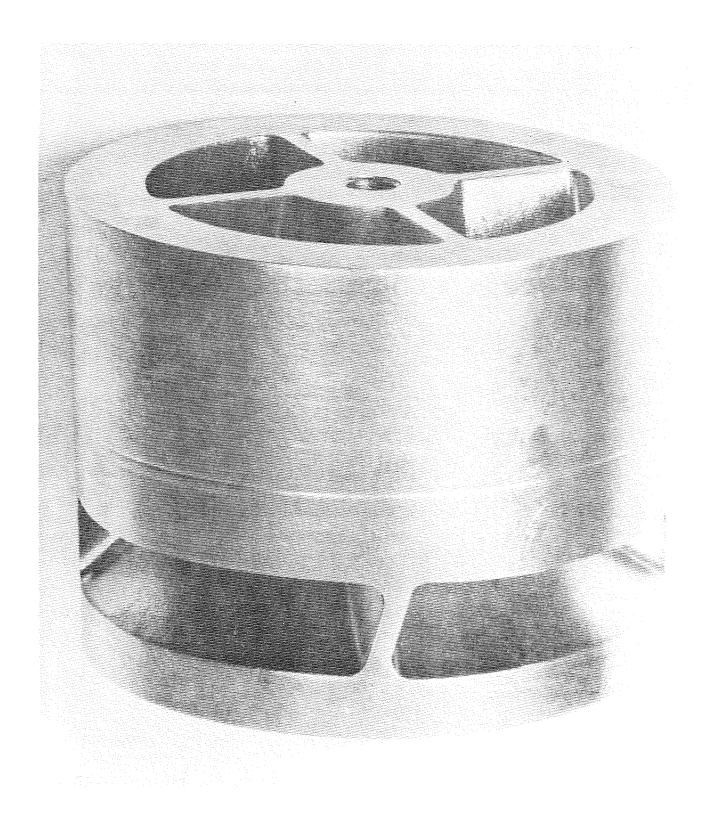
Final Simulated Impeller Showing Discharge Area After Removing 0.020 of an Inch of Material From All Surfaces by Chem-Milling.
